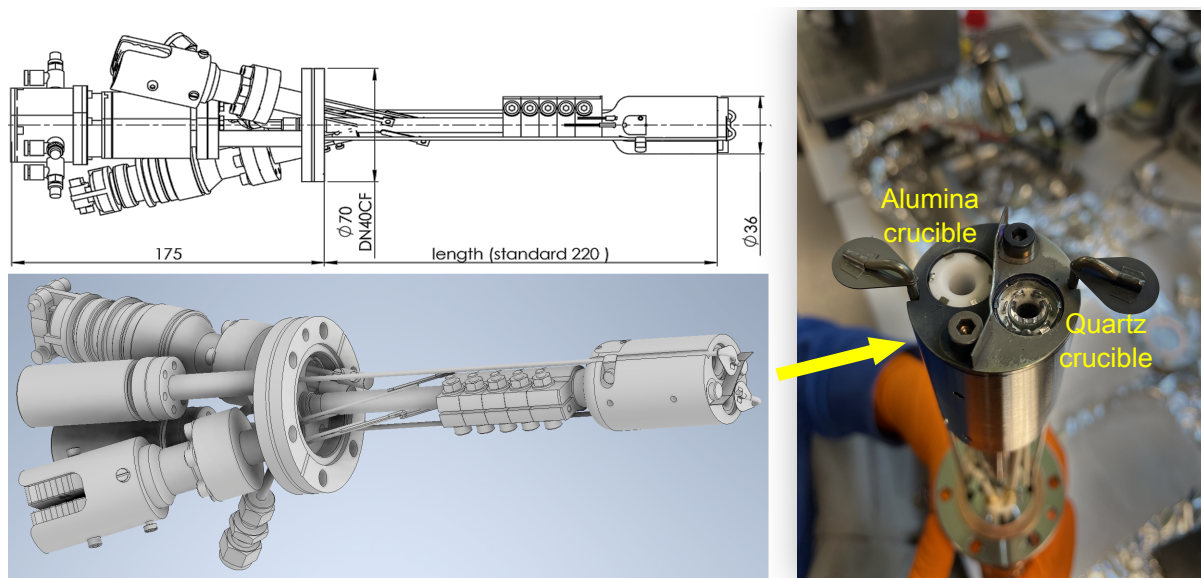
Co-evaporator | Schematic drawing and CAD view of the MBE Dual Source Cluster evaporator with dimensions. The circle zooms in on the cell-clusters, which contains a quartz and alumina crucible. The image on the right-hand side shows a top view of the crucibles, with the shutters visible.
